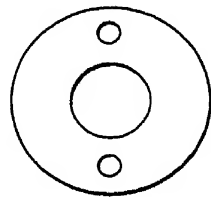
SMALL NUT FOR WHICH A JIG CAN BE READILY MADE
